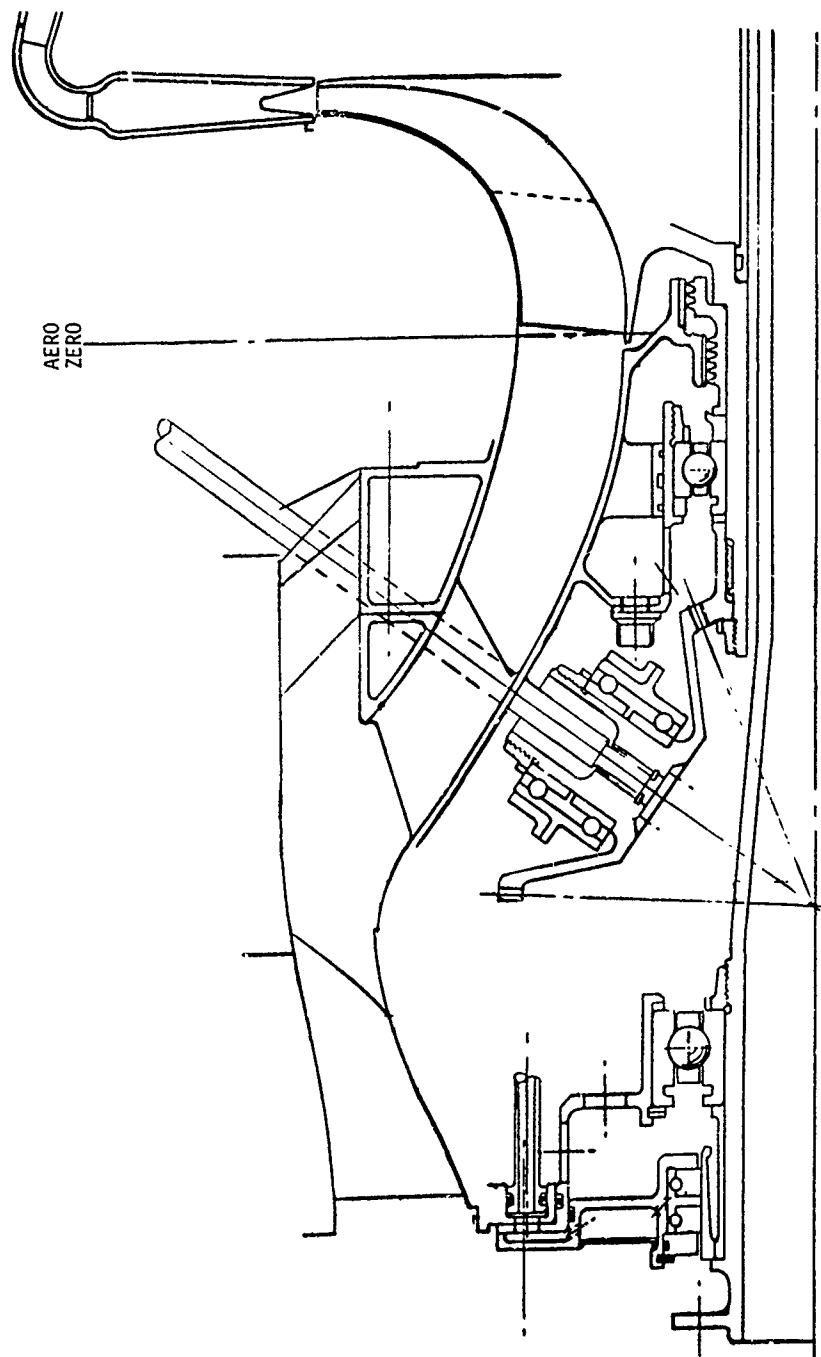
2 Lb/Sec T700 Type Separator With PTO Shaft. Canted Aft.
